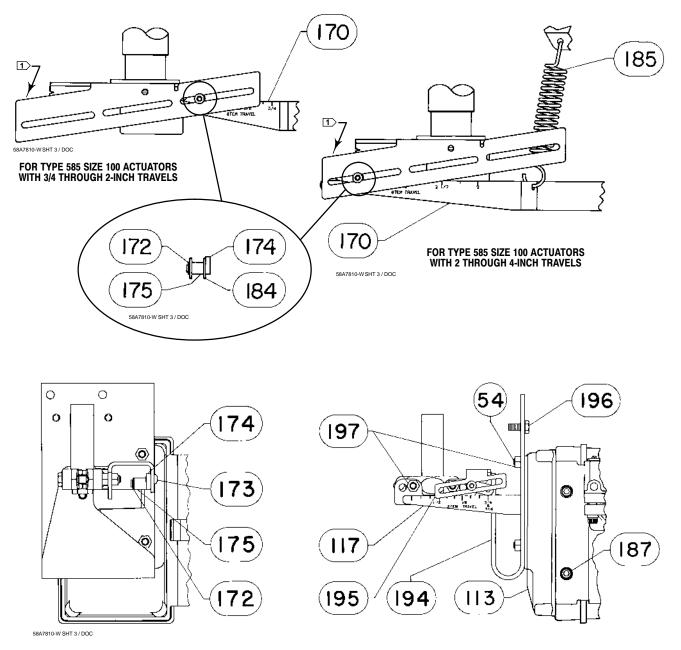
Feedback Assemblies for Type 3610J, 3610JP, 3620J, and 3620JP Positioners
